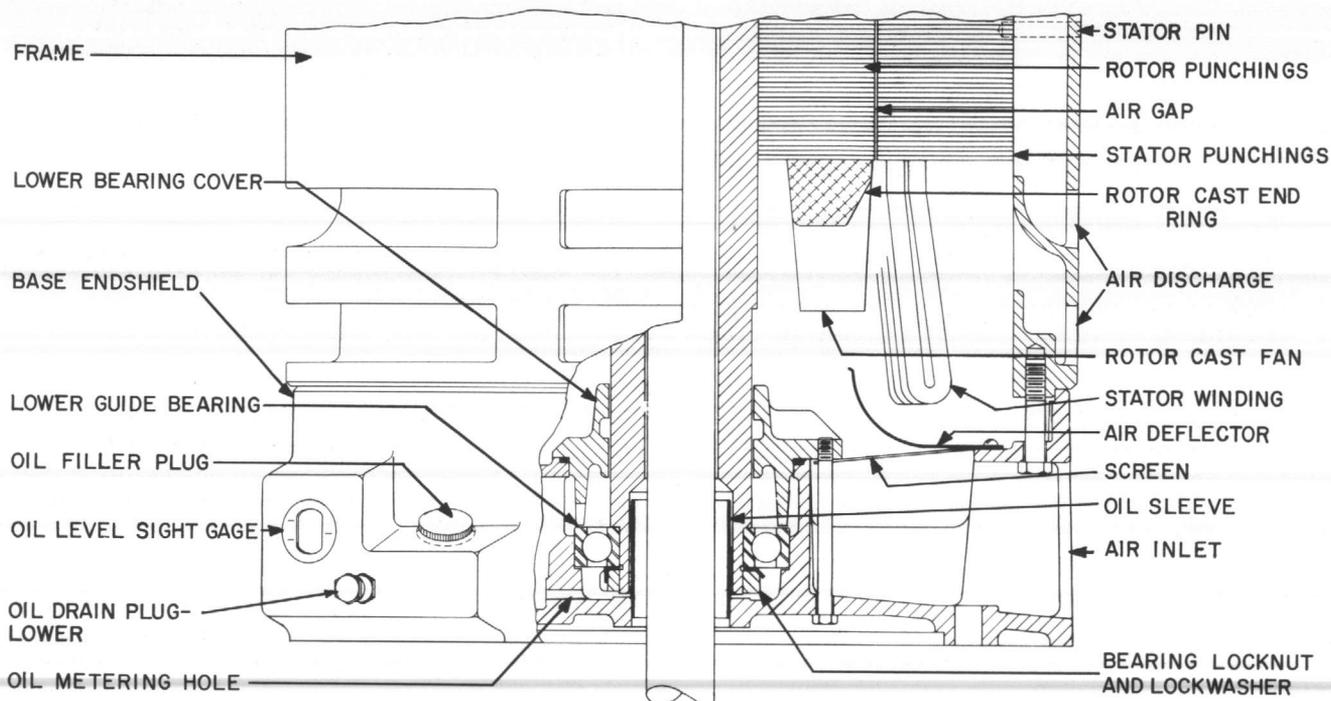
Typical bottom bearing construction for 3000- and 3600-rpm motors in frames B444 - B445
